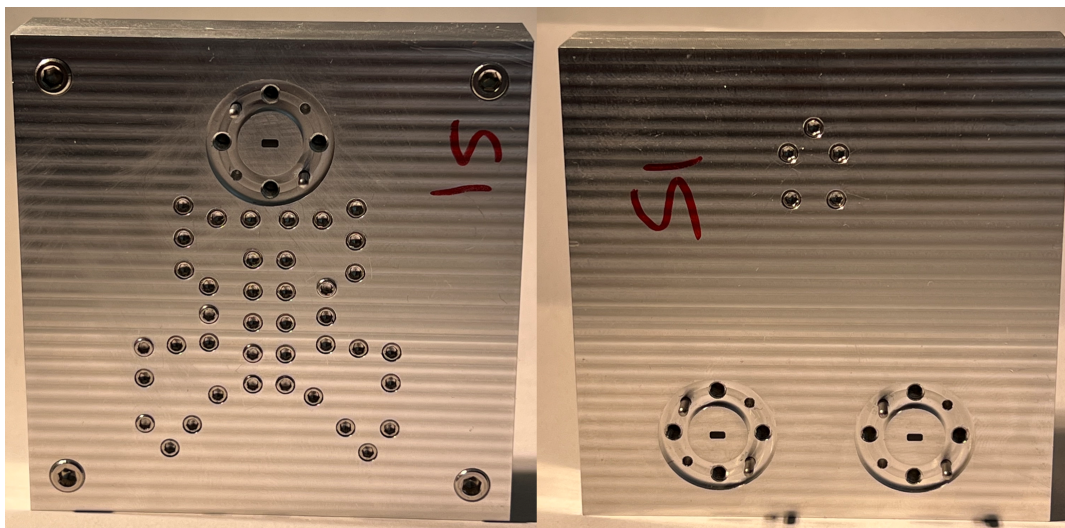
Bottom View of the Final Design Assembly for manufacturing
